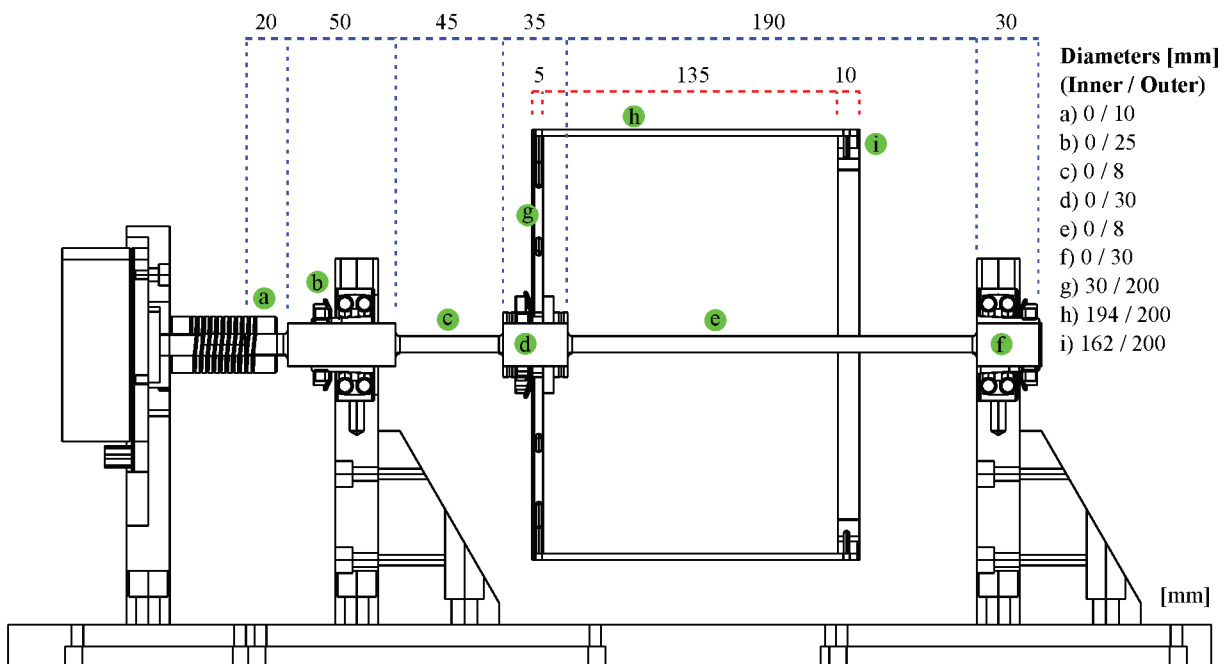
Flywheel test-rig scheme, in cross-section view, with its main dimensions indicated
